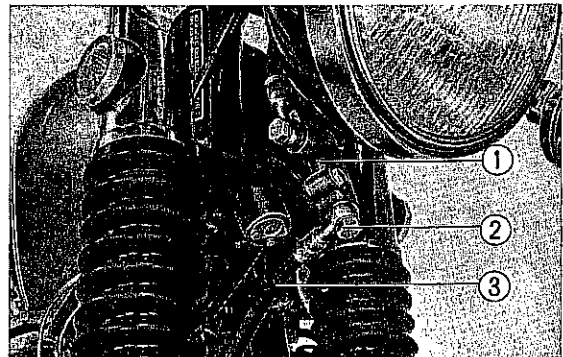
① Oil joint ② Oil joint bolt ③ Brake hose
